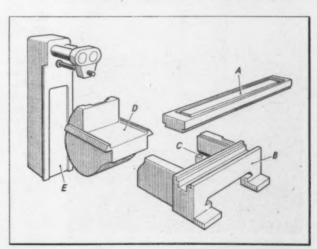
Diagram showing the construction of the Somua type Z milling machine
